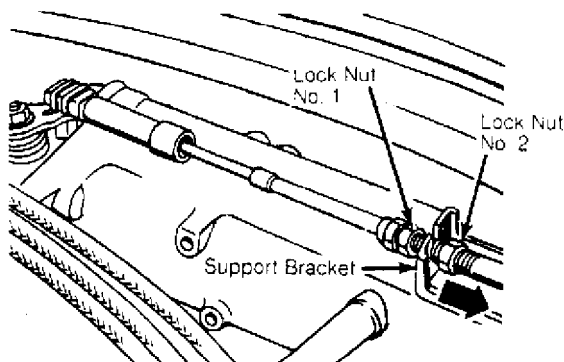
Adjusting Throttle Cable (Except Vanagon)
